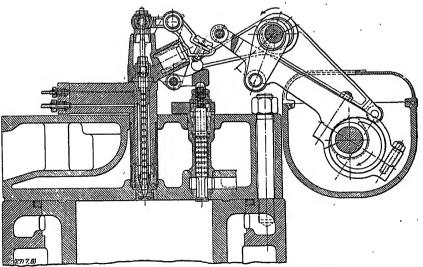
Construction of Valve Gear for Fuel Injection and Starting Air Valves (Tosi).
